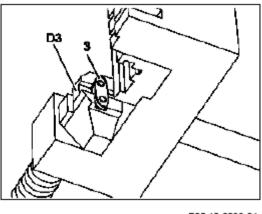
Placing Assembly Insert In Rivet Press Tool Courtesy of MERCEDES-BENZ USA
